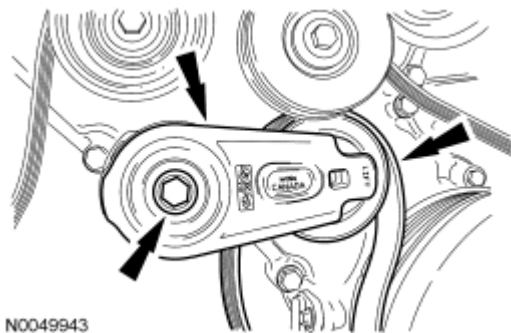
Locating Bolt, Supercharger (SC) Drive Belt Tensioner & SC Drive Belt
